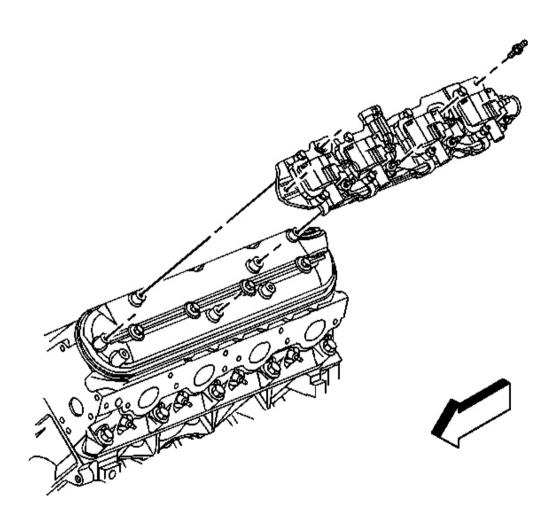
Left Ignition Coil Bracket & Studs Courtesy of GENERAL MOTORS CORP.
